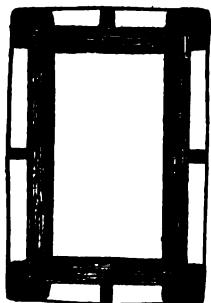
PICTURE FRAME IN BLOCKS AND STRING.
